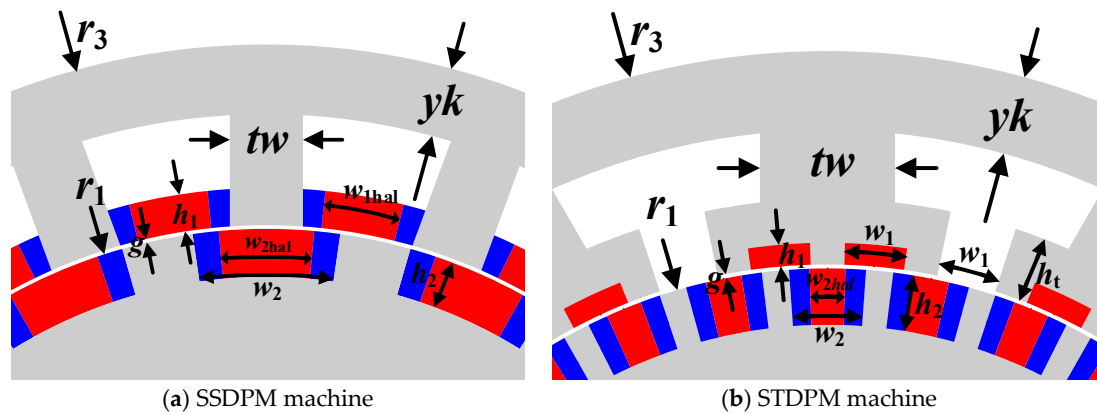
Key design dimensions of dual-PM machines. (a) SSDPM machine; (b) STDPM machine.
